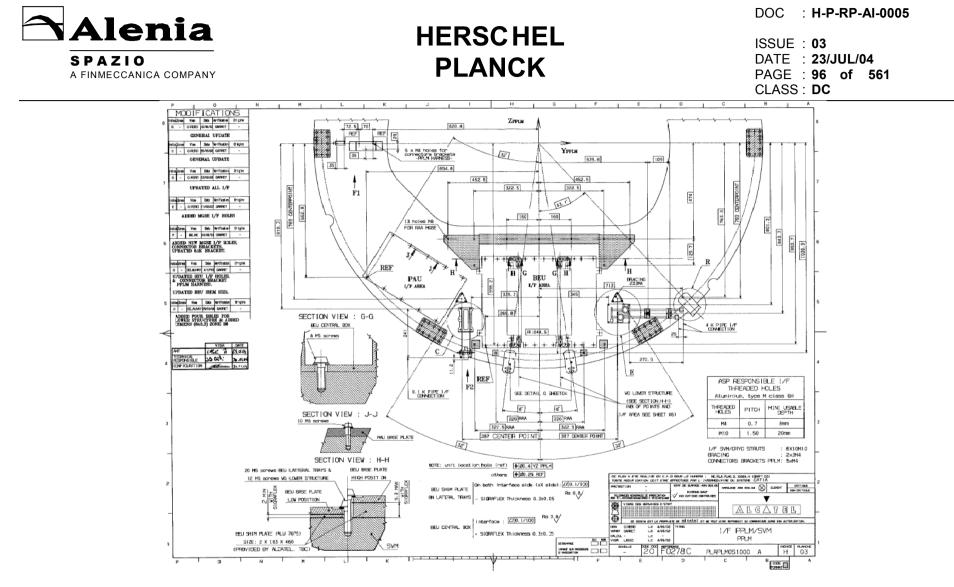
Planck Payload Subplatform Sections views of the mechanical I/F on top side.
